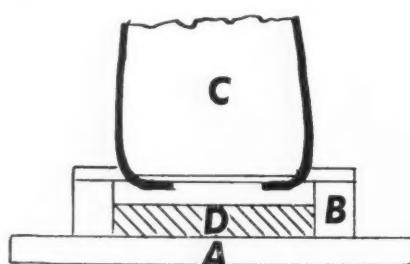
Schematic diagram of internal-pressure machine for direct molded footwear. A is electrically heated fixed metal base which may be plain or carry a design for the sole bottom. B is the ring which forms the mold cavity and is mounted on the base plate. The ring may be solid or split and may or may not be electrically
